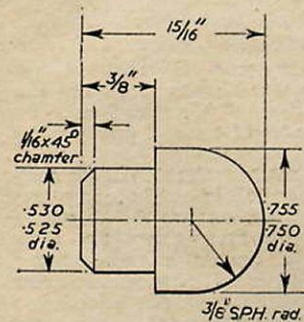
The assembly guide for the right-hand mainshaft oil seal.
